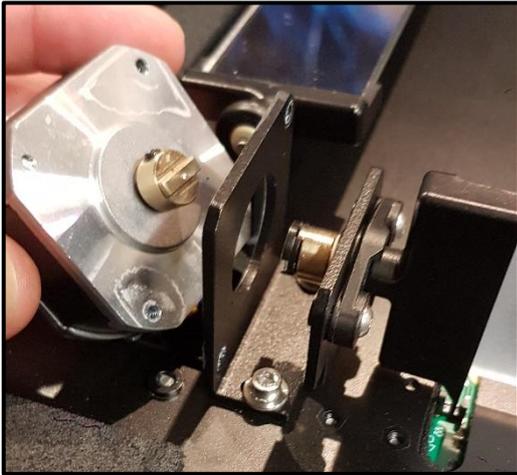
NEW STEPPER MOTOR ASSEMBLY
